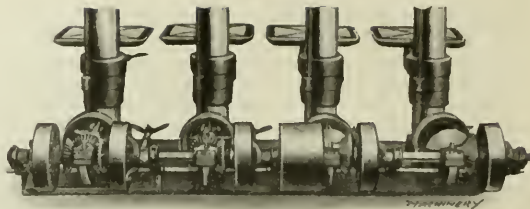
Countershaft on Silver Four-spindle Gang Drill
